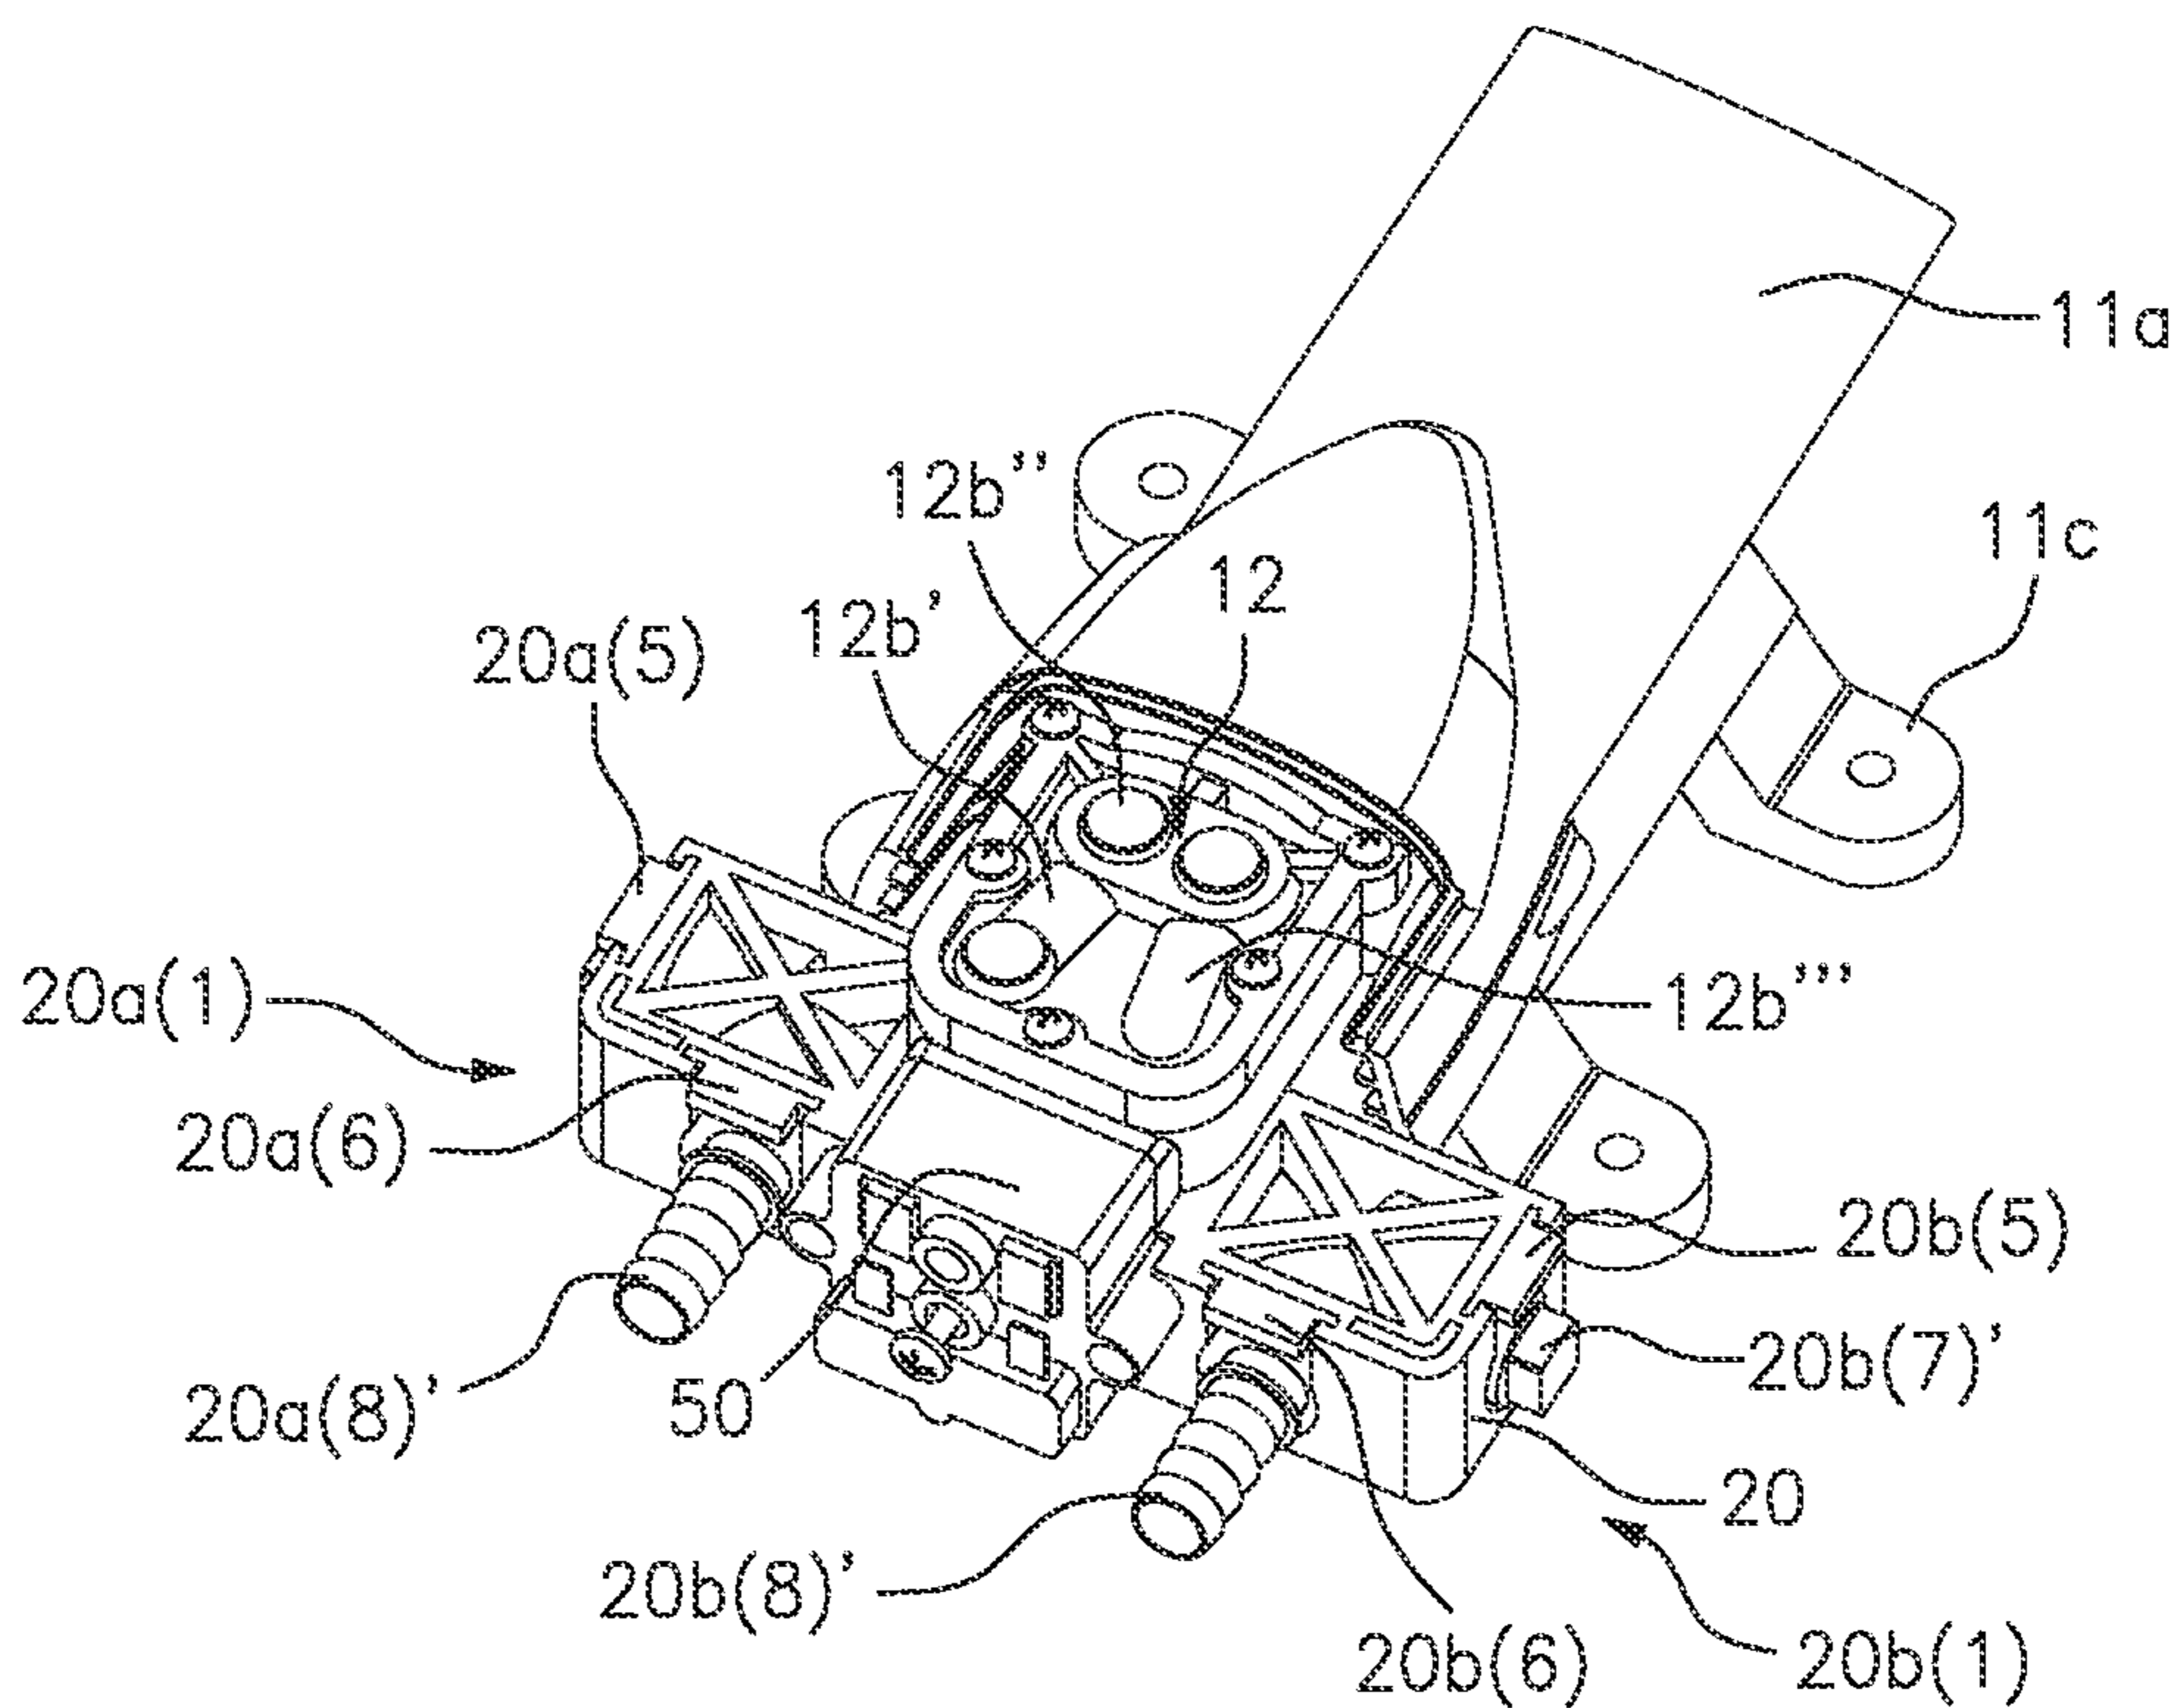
B: Pump Assembly showing another way of port fitting connection in front
